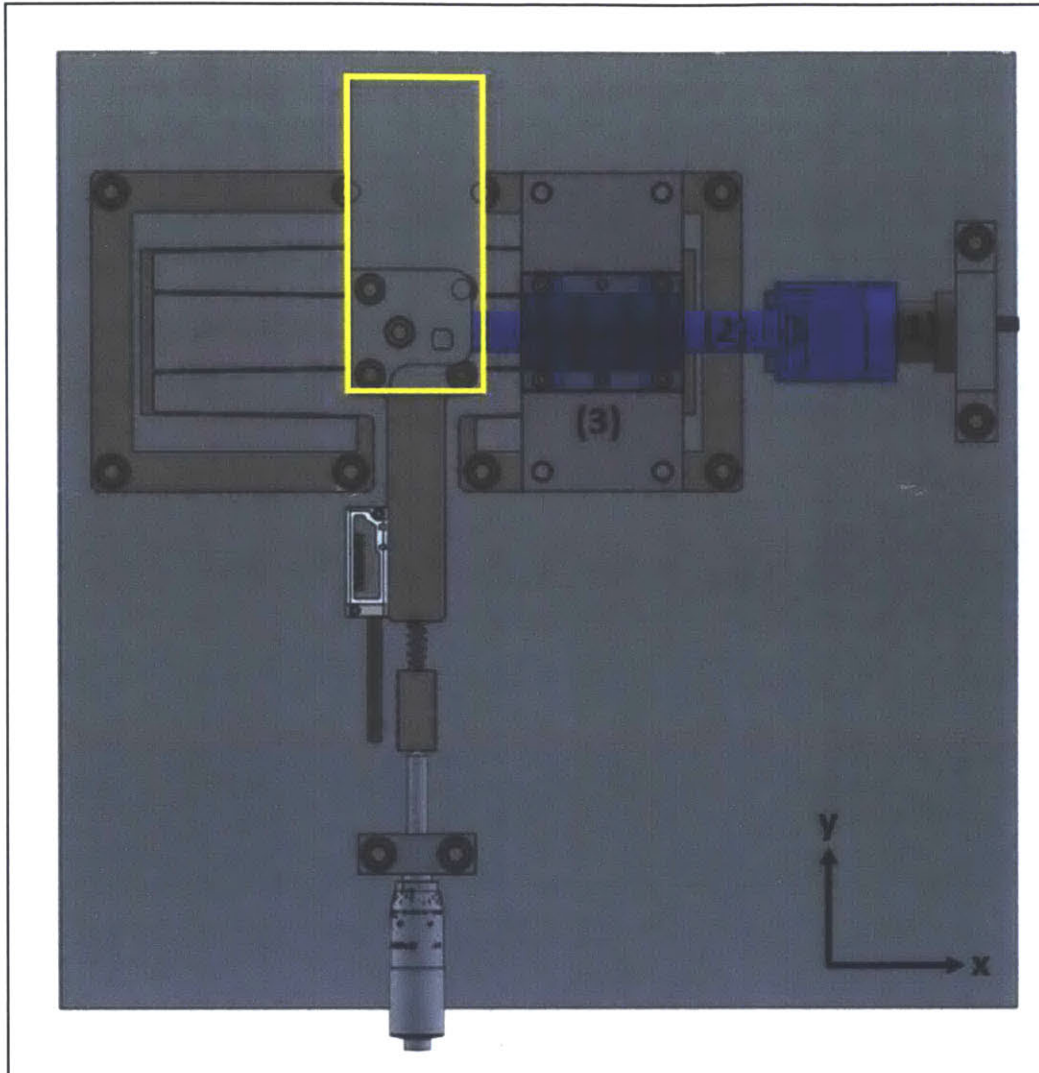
Voice coil actuator (1), shaft (2), and air bearing guide (3) shown in blue. Mouse location represented by yellow box.
